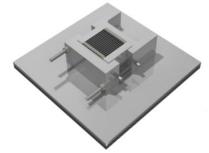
Heat sink Mounting Fixture (Air Flow from Top to Bottom)
